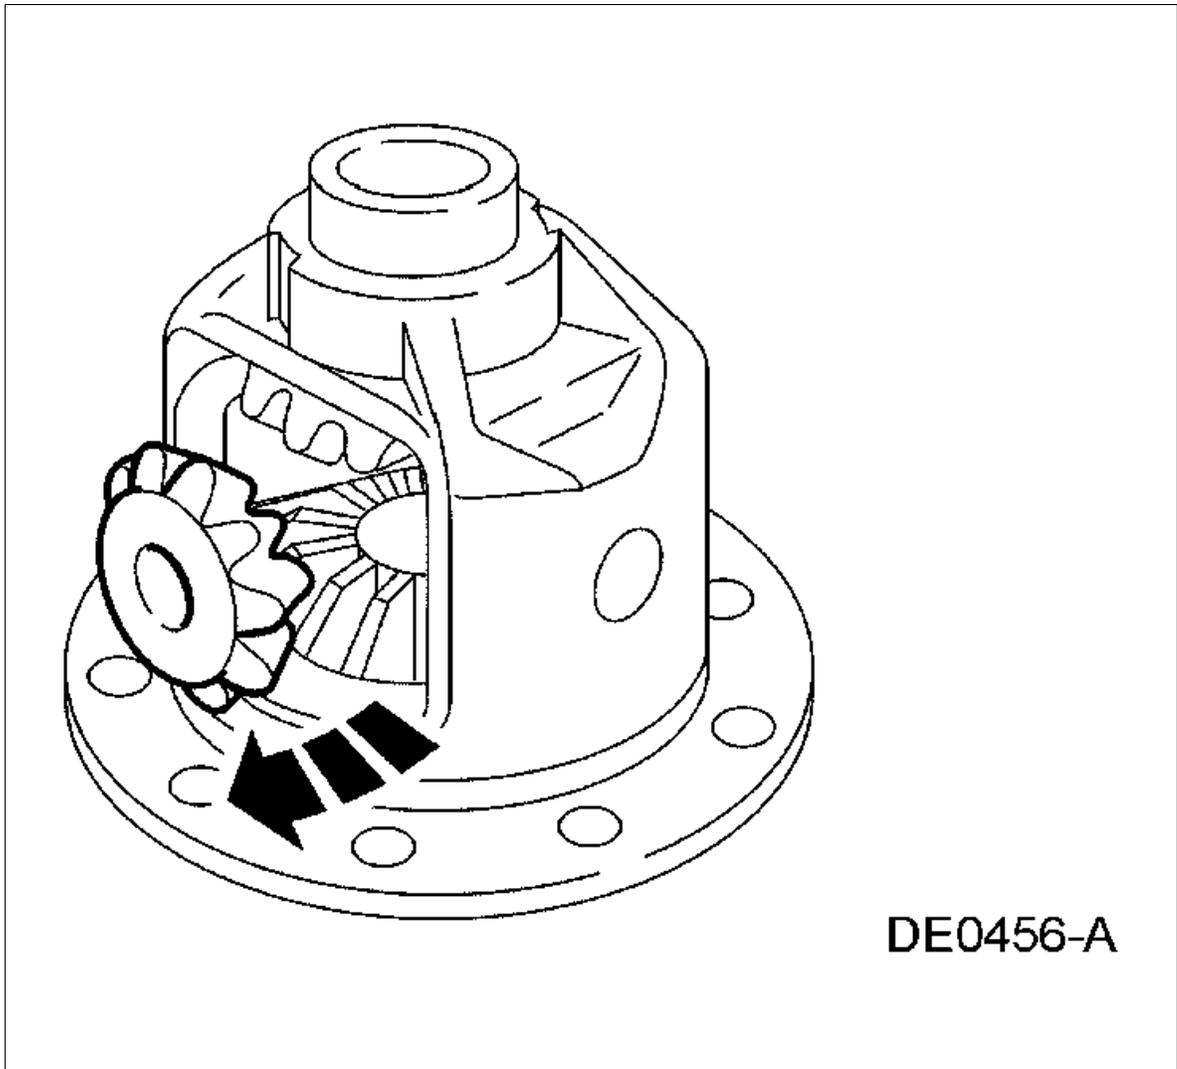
Engaging Differential Pinion Gears With Differential Side Gears
